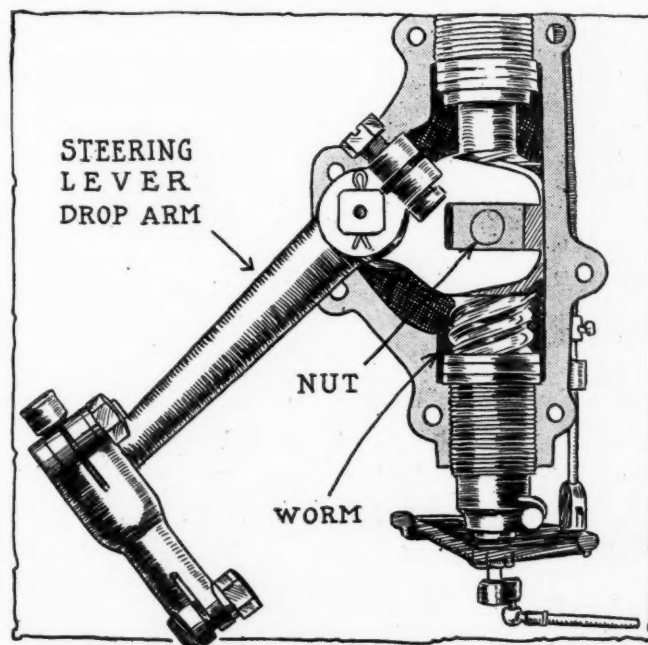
Irreversible worm-and-nut type of steering mechanism
